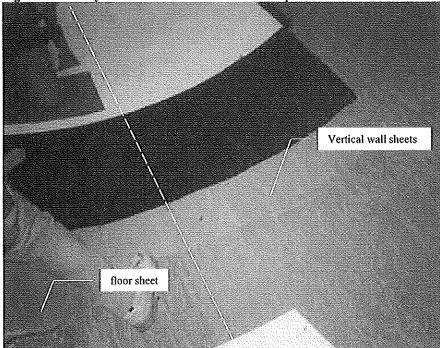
Shell-Floor Layout: One sheet runs the length of vessel
